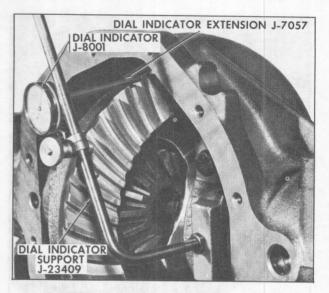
Checking Pinion To Ring Gear Backlash
